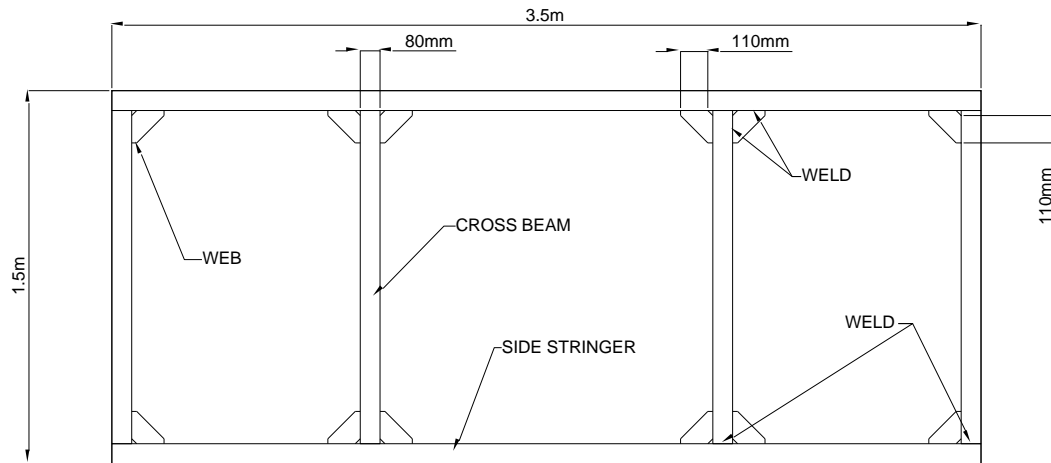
Item of Plant Chassis Showing Welded Joints
